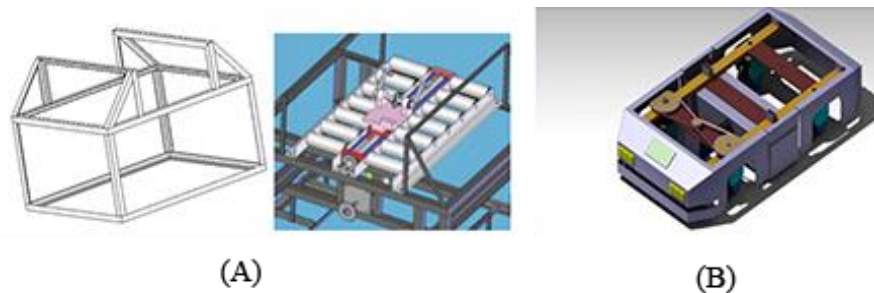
Structure and loading system of a structural steel frame (A); frame built of Dent Proof Sheet Metal MS (B) (Archila and Becker, 2013; Dudeja et al., 2015).
